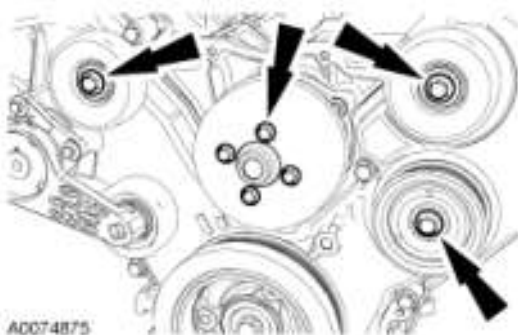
Locating Coolant Pump Pulley And Accessory Drive Belt Idler Pulley Bolts
